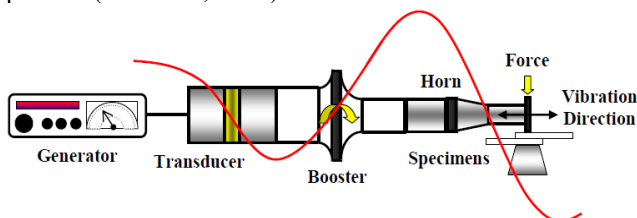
Typical configuration of ultrasonic system for welding materials
